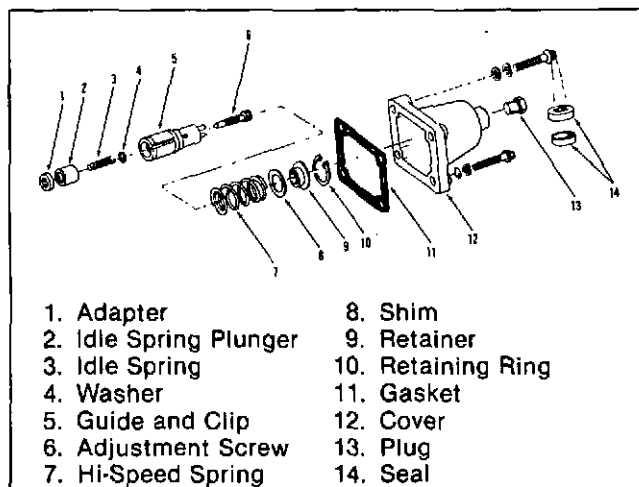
, (F5148). Standard Governor — Disassembled View.
